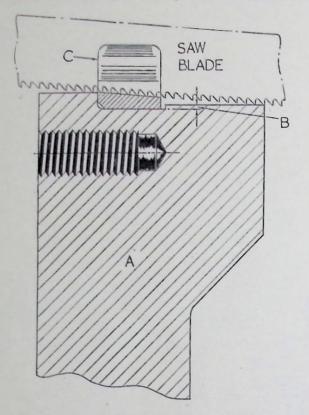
Method of removing Starter Ring Gear. A. Flywheel B. Depth of groove. C. Flywheel tooth.
